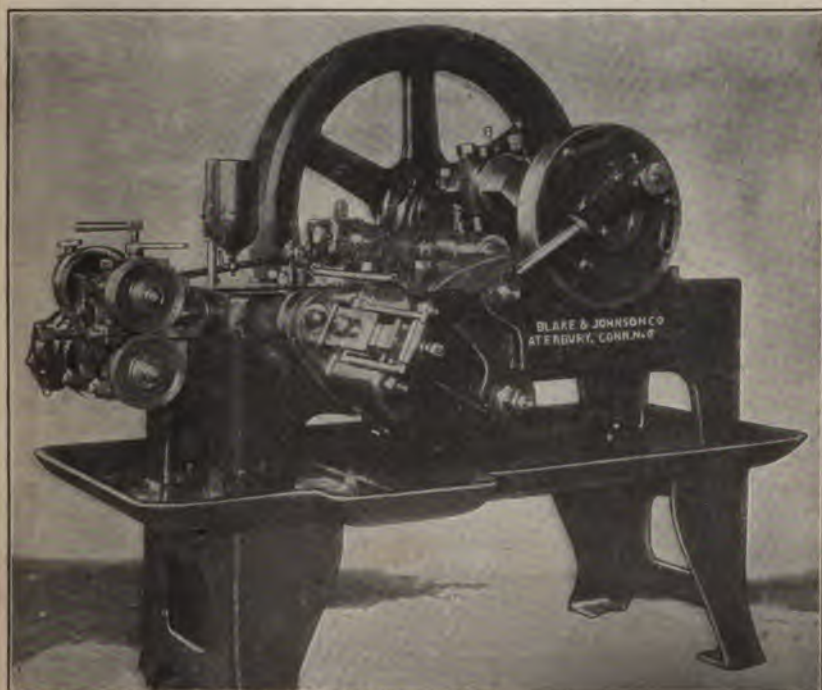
Double-stroke Solid-die Cold-header—Blake & Johnson
